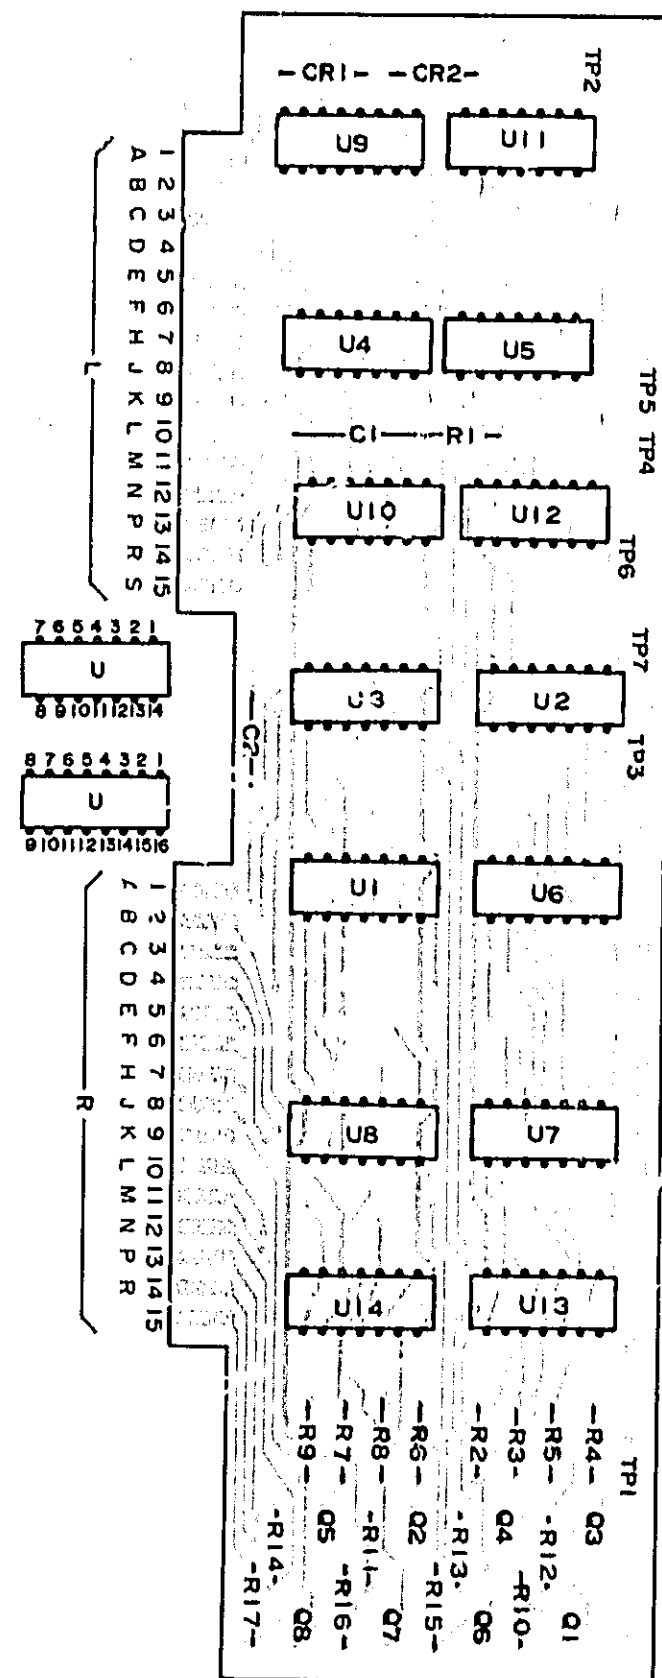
A17 Auto Range &amp; Lamp Driver Board Assembly Component Locations.
